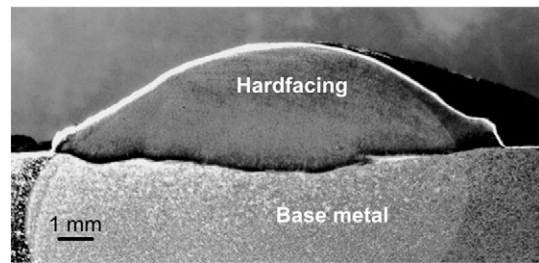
Macrograph of hardfaced weld deposit.
